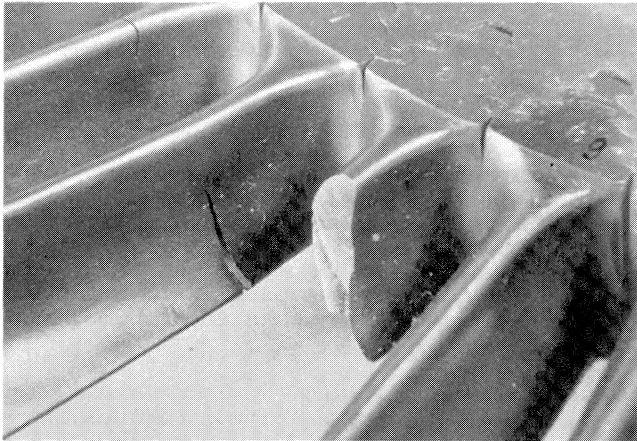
Fatigue Failure on a Turbocharger Used on the Heinkel 111 Aircraft. (Courtesy of Dr. Max Bentele)
